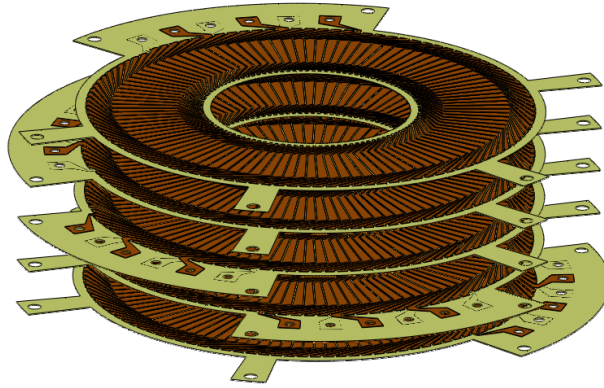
Exploded view of a stack composed of five PCBs shifted by  $60^\circ$  with respect to the previous PCB.
